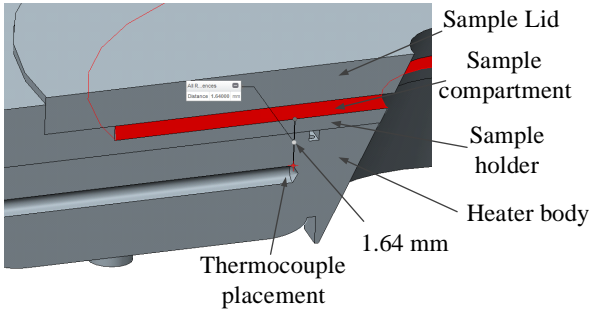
Part of cross-section of heater body, sample holder and sample lid showing placement of inner ring thermocouples
